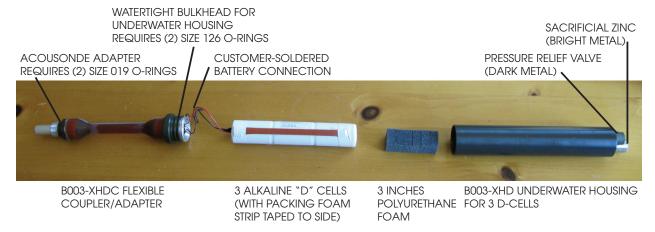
Exploded view of B003-XHD external battery housing assembly.
